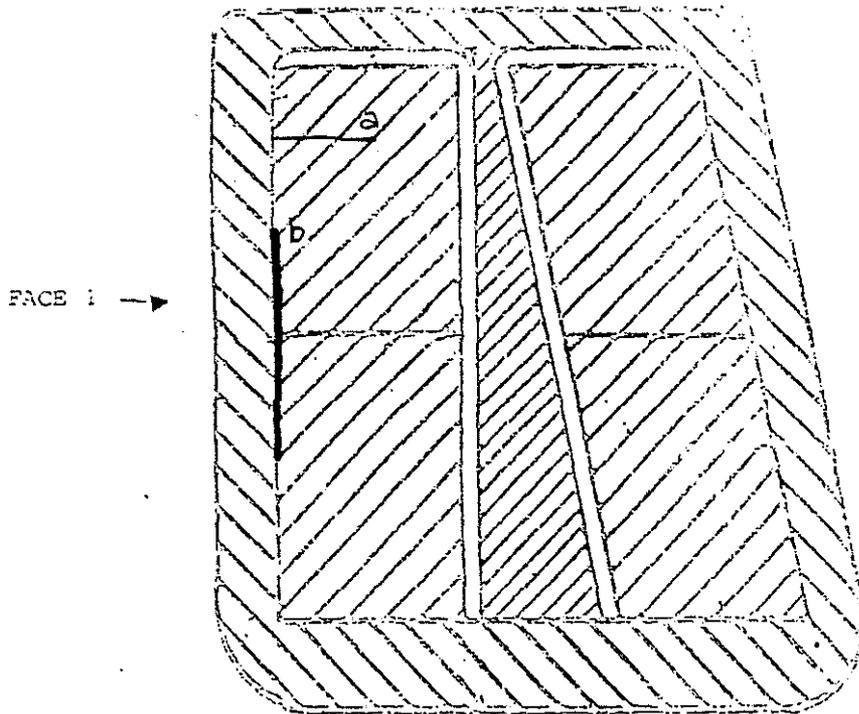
Scheme of the EH 101 main rotor hub section used like sample for U.S. testing with thin cuts reproducing defects:
